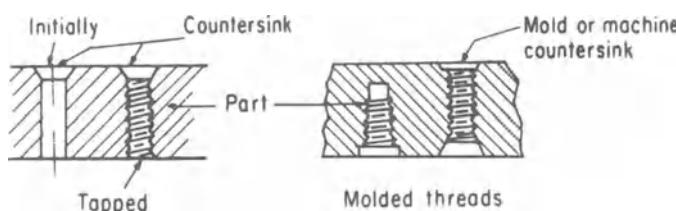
Holes having molded-in threads or ones that are to receive tapped threads should have molded-in countersinks to avoid chipping and burrs. If a threaded pin is being used to mold threads in a through hole, the lead thread on the mold pin should have a pilot thread for support.
